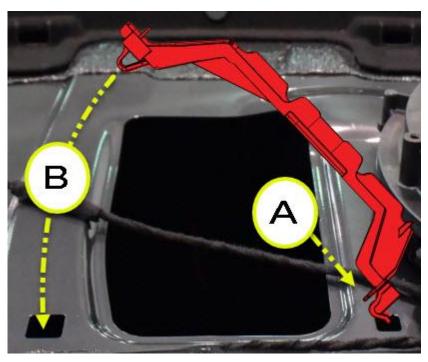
Install the new mounting bracket by inserting the retaining tab (A) into the left mounting hole. Rotate the bracket down into the right mounting hole (B).
